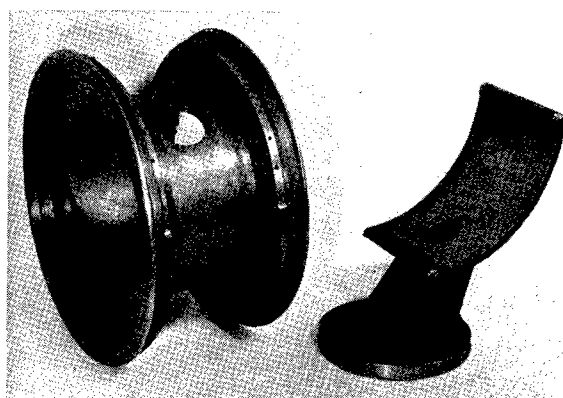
Spool, gooseneck, and end flanges for HP-3DS transducer.
